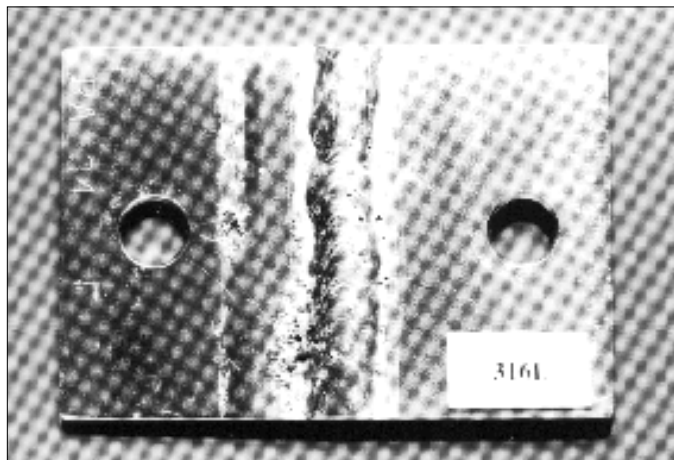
A. Corrosion in smeared surface layer formed by power wire brushing 316L welded specimen with stainless steel wire brush.
